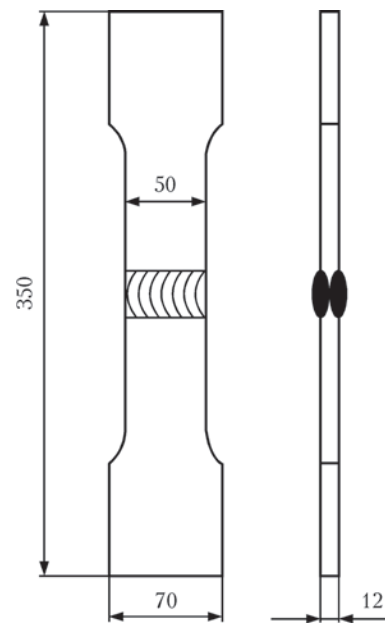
Shape and geometrical dimensions of samples of butt welded joint
